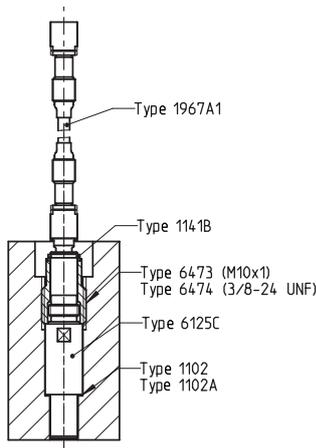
Direct mounting of sensor Type 6125C1... with mounting nut
